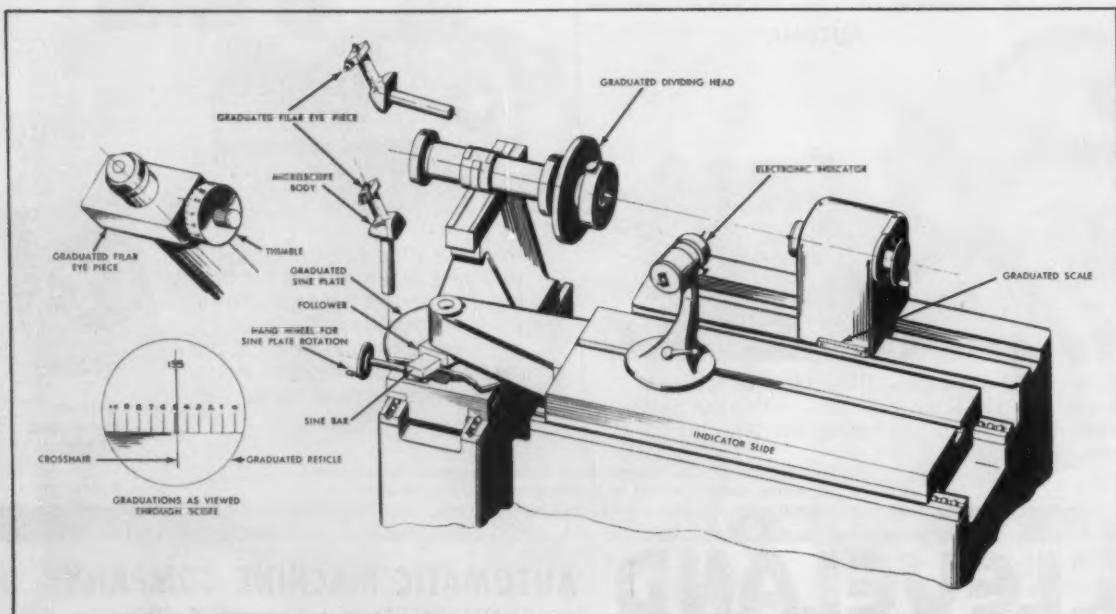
Reticles and optical systems of sine plate and dividing head of gear checker shown in Fig. 1
